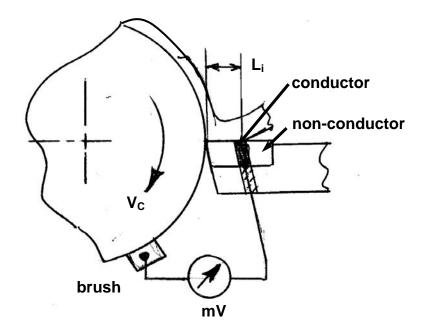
Compound rake used for measuring cutting temperature along rake surface
